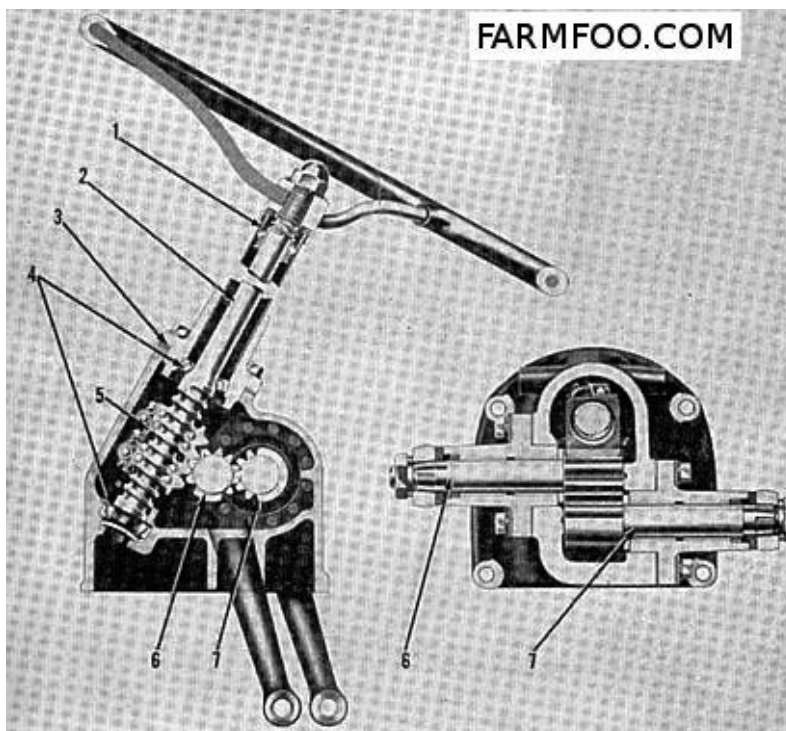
Cross section side and top views of steering gear unit used on model 8N prior to tractor serial 216989. Sectors (6&7) have straight teeth and left sector (6) is meshed with ball nut.
